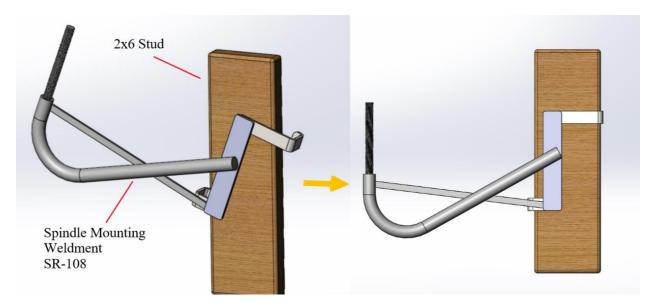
Mounting the assembly is easy. Just tilt, place and release.
